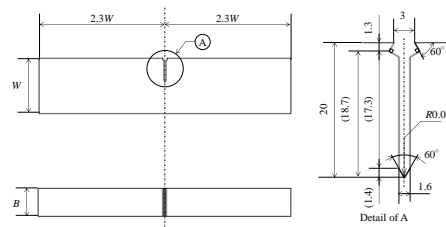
Dimensions of SE(B) Specimen of 46 x 23 mm
